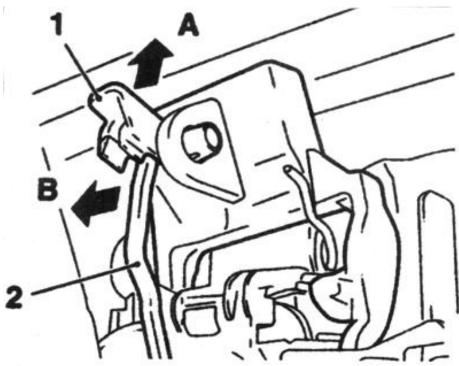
Disconnecting traction door lock (On example castle back side door):
